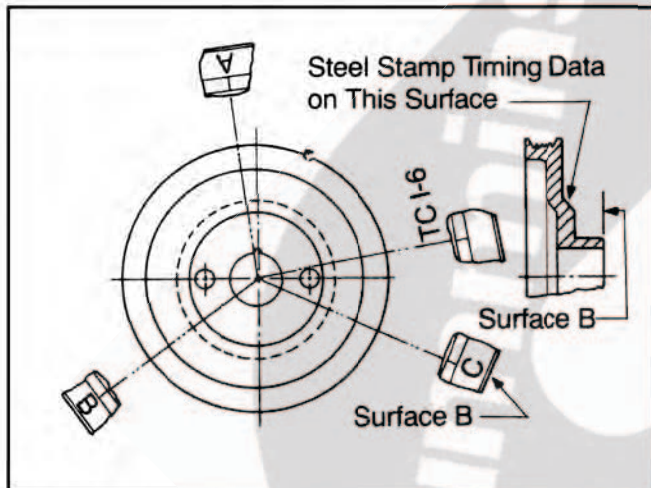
, (K11920). Accessory drive pulley marking — KT/KTA19
